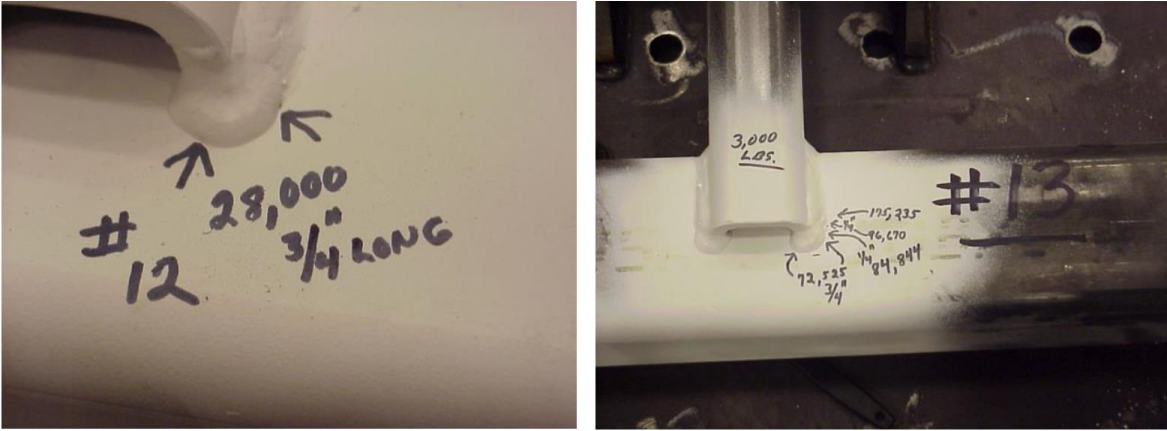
31: Fatigue crack at the weld toe of the Complex tubular welded joint (Sample # 12 and 13) (JD)
